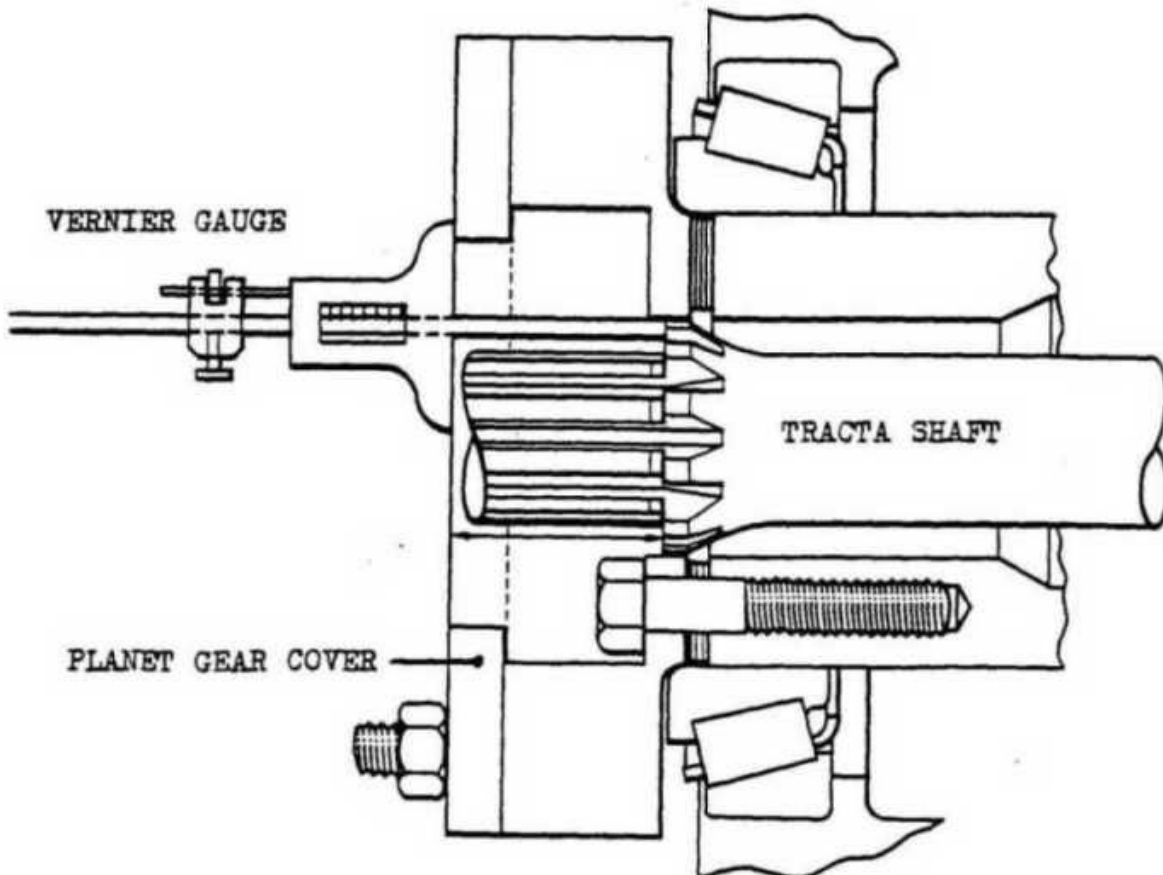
MEASURING FOR TRACTA JOINT CLEARANCE
